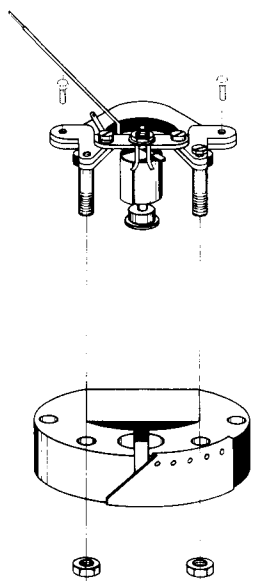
Exploded view of some sub-assemblies which are supplied already assembled.
